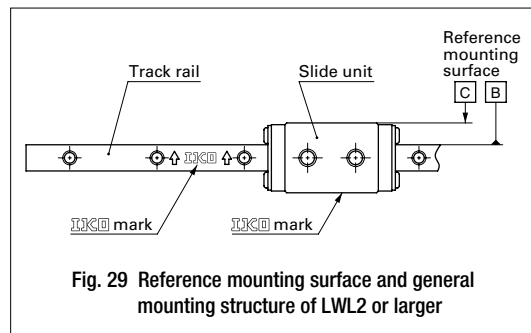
Reference mounting surface and general mounting structure of LWL2 or larger
